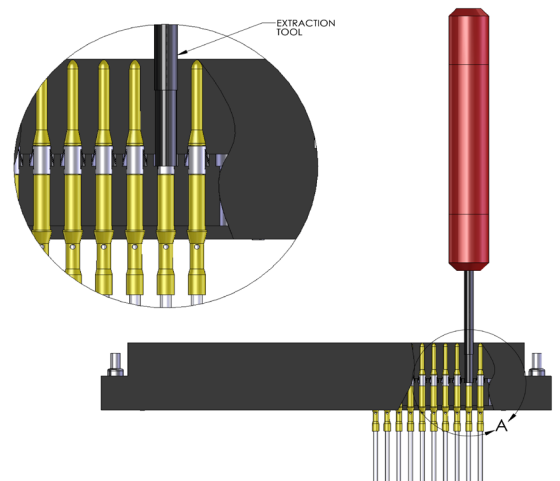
Figure B. Ensure that the extraction tool is kept perpendicular to the module face to avoid damage to the contact or tool.
